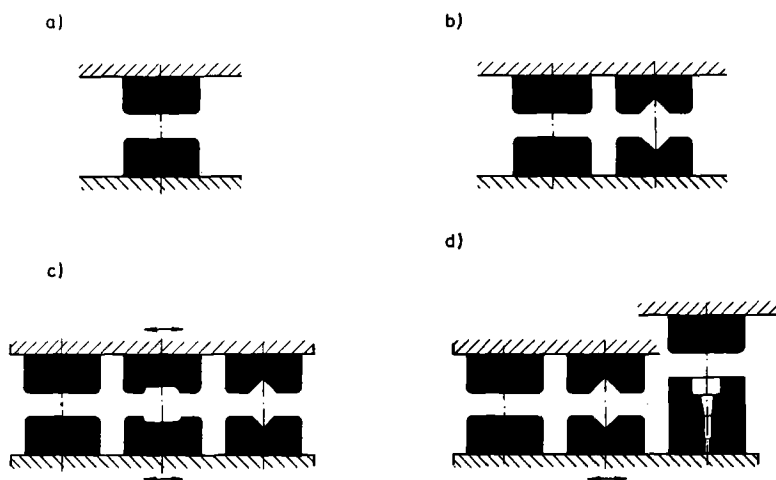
Various tool saddles for automatic preform forging press: (a) flat tool saddle, without tool shift; (b) flat and profile tool saddles, without tool shift; (c) flat calibrating and profile tool saddles, with tool shift top and bottom; (d) flat and profile tool saddles with bottom tool shift, for upsetting operations.
